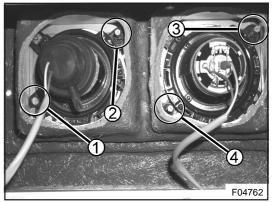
A: Location of adjusting screws (view from the rear on the right headlight assembly)
